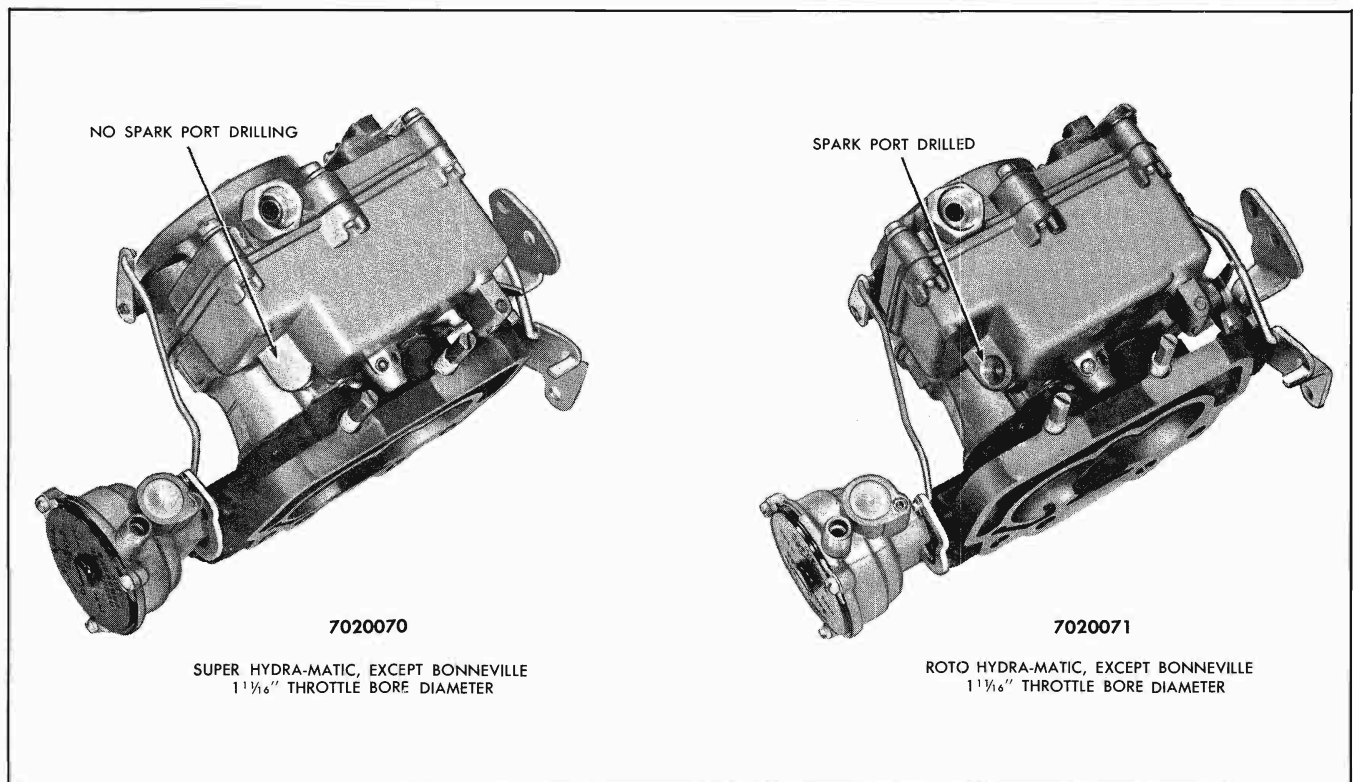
B-57 Comparison of 7020070 and 7020071 Carburetors Showing Spark Port Drilling No Throttle Return Check on 7020070—7020071 Has Throttle Return Check
